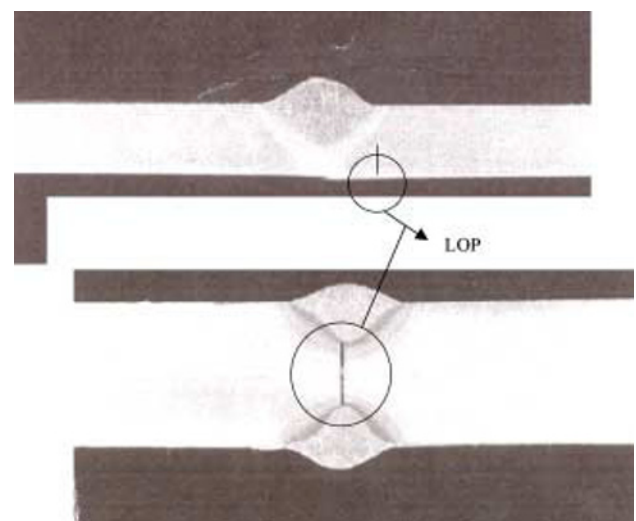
Weld defects: lack of penetration min a single-sided (6 mm) and double-sided (12 mm) St1.1 steel sample (IIS).
